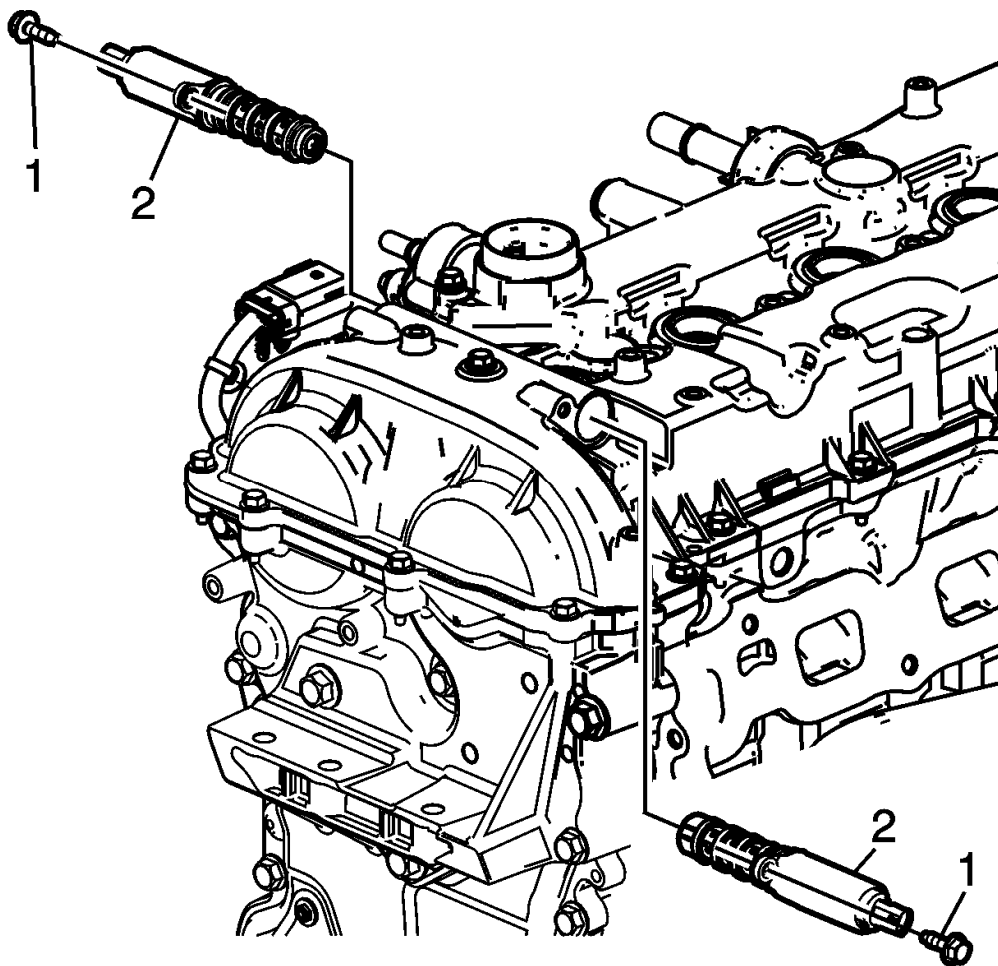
Camshaft Position Actuator Control Solenoid Valves
